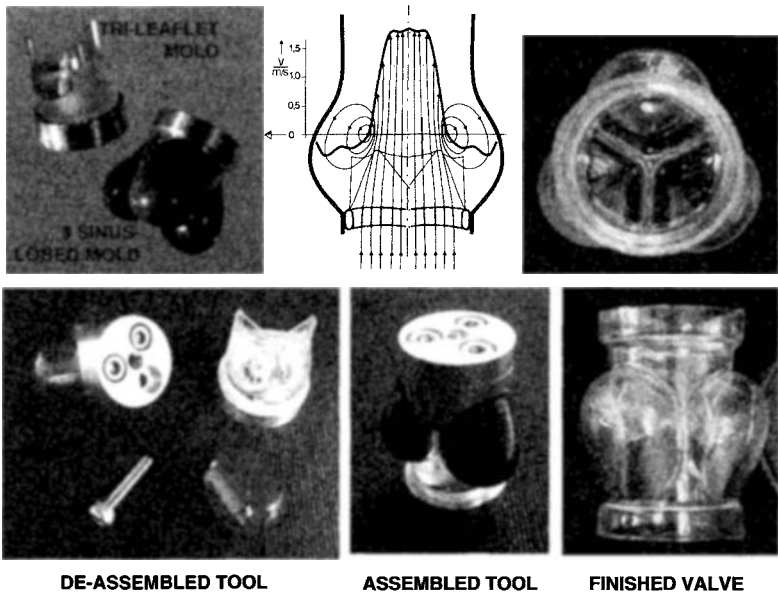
Manufacturing steps in making a tri-leaflet polyurethane valve. Note the complex die assembly needed to produce a seamless polyurethane valve by thermoforming.
